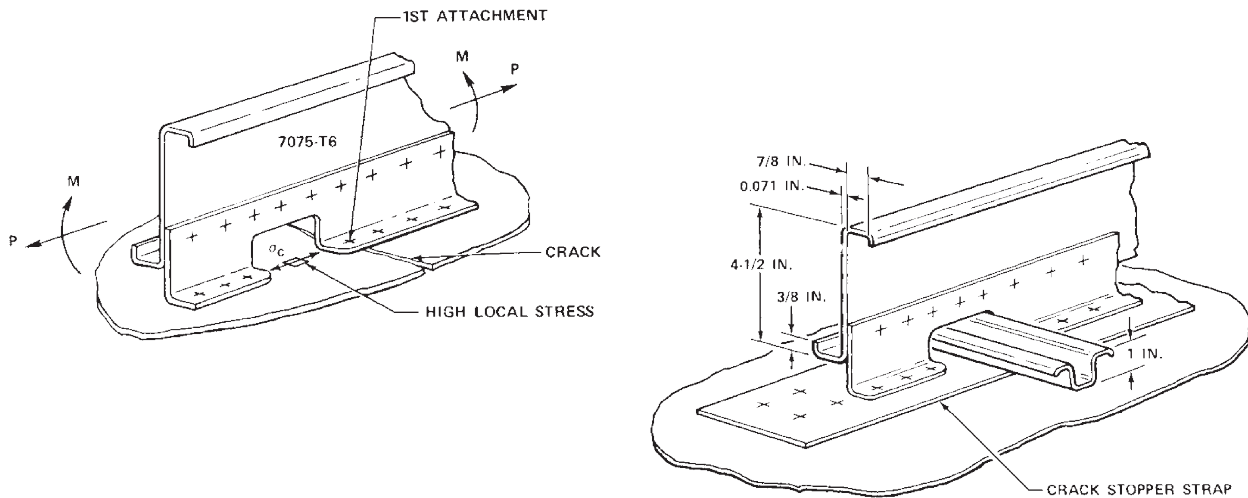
Crack (left) in a DC-10 fuselage in the longitudinal direction, due to cabin pressure loading, and (right) a crack stopper strap. Rivet locations are indicated by (+), and the longeron member with a hat-shaped cross section is omitted on the left for clarity. (From [Swift 71]; copyright © ASTM; reprinted with permission.)
